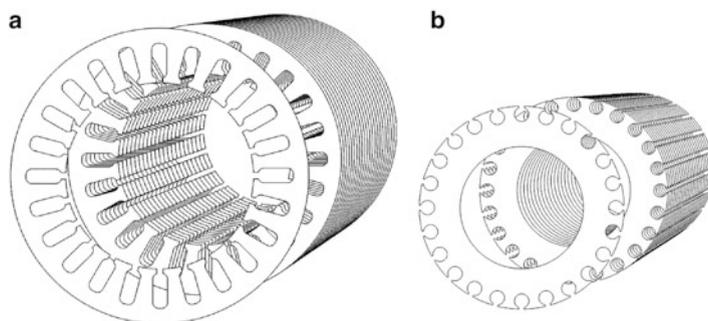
(a) Stator magnetic circuit of an induction machine. (b) Rotor magnetic circuit of an induction machine
